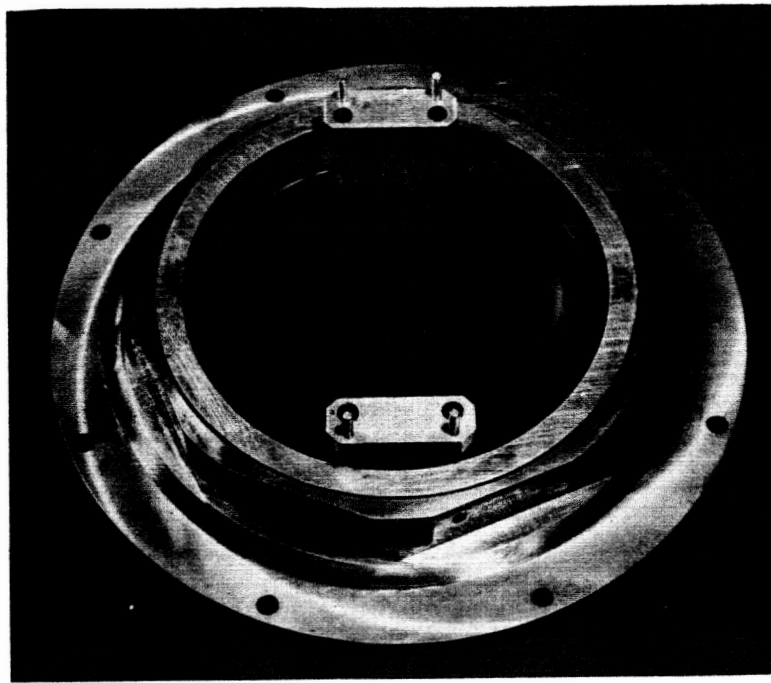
INPUT GEAR AND GIMBAL RING - REAR VIEW
